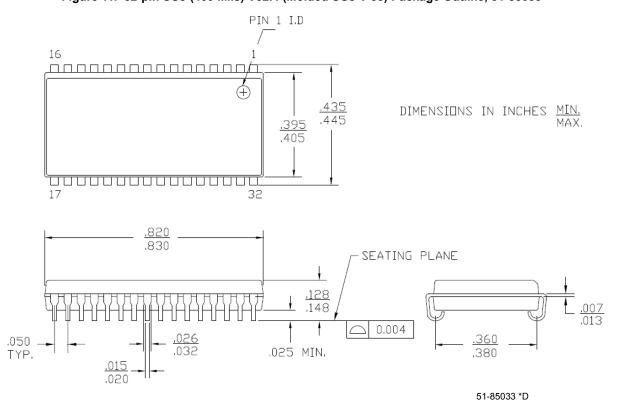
32-pin SOJ (400 Mils) V32.4 (Molded SOJ V 33) Package Outline, 51-85033
